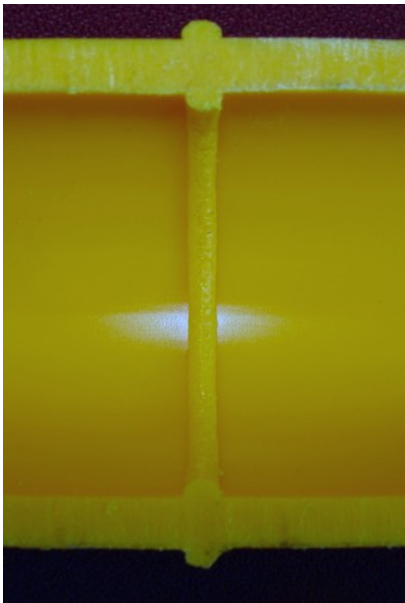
Alignment of Coiled Pipe Ends Through a Butt Fusion Machine
